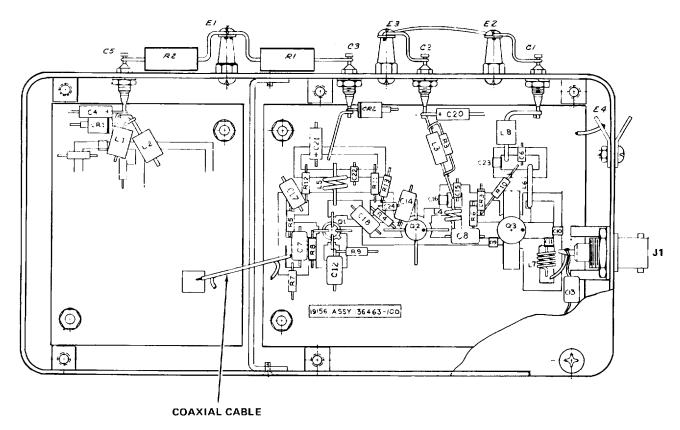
OSC/Exciter Assembly, 1A4A3 Parts Location Diagram
